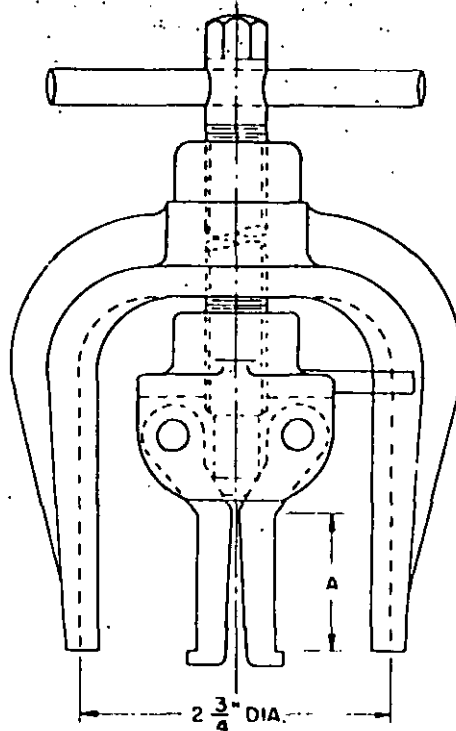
Type IV, puller, mechanical, bearing, clutch pilot.
